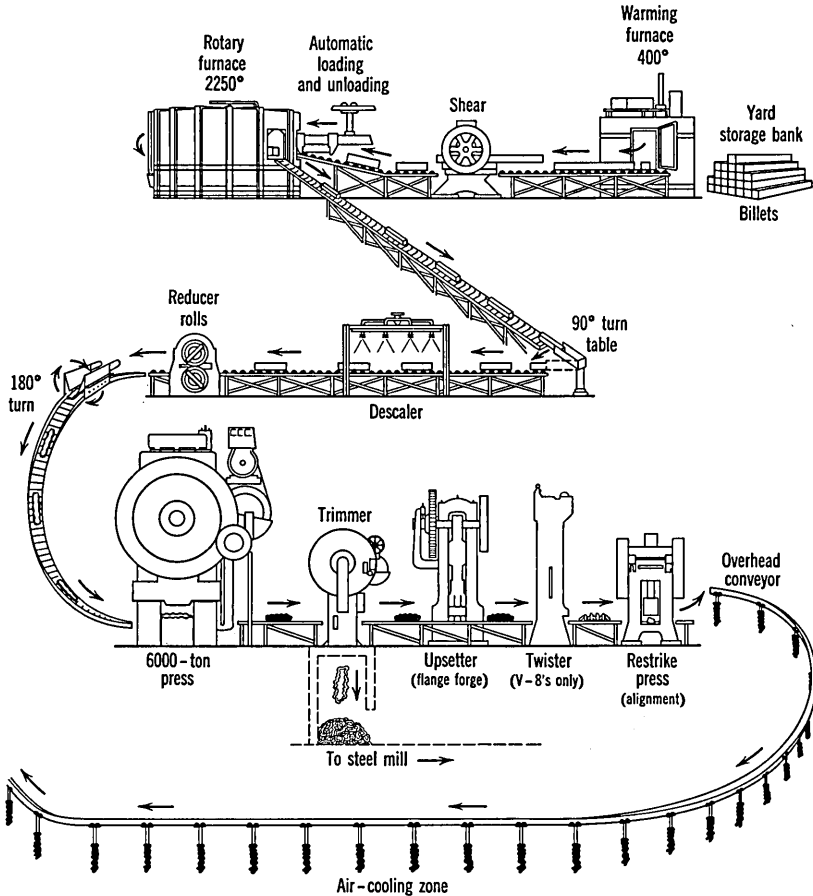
Continuous forging line for automotive crankshafts (Courtesy Dodge Division, Chrysler Corp.)
